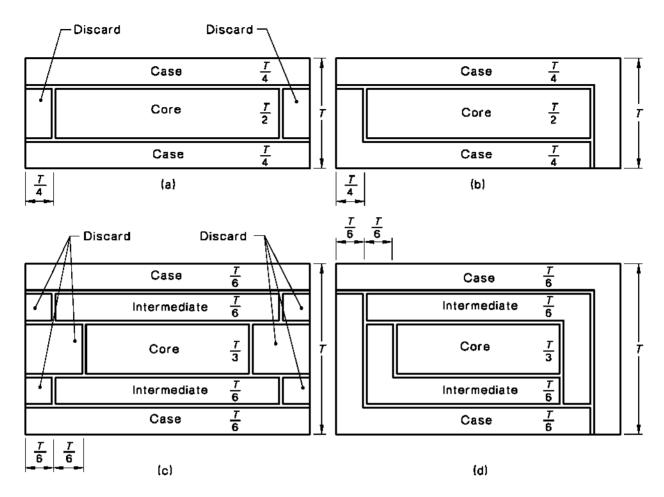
CUTTING PATTERNS FOR TEST PIECES
